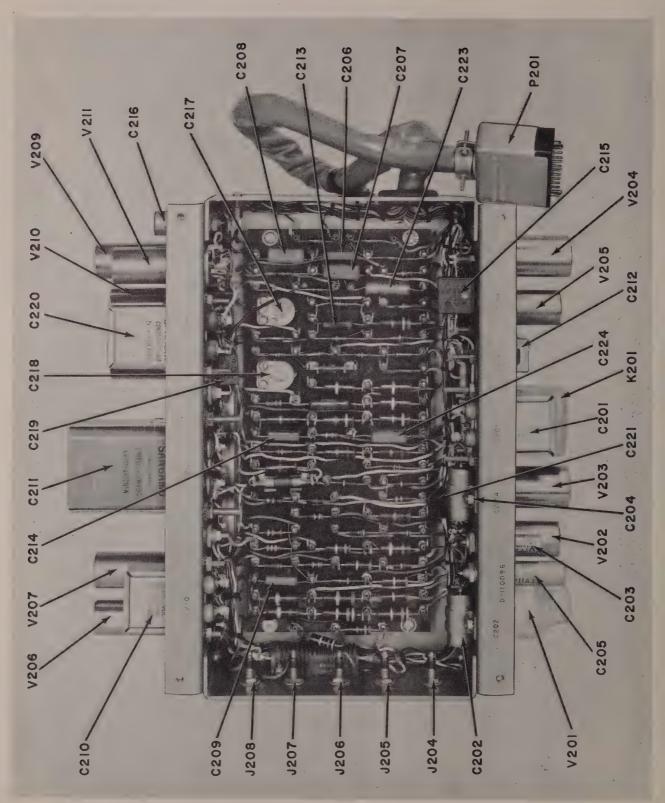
Modulator Chassis, Bottom View (Sheet 1 of 2)
